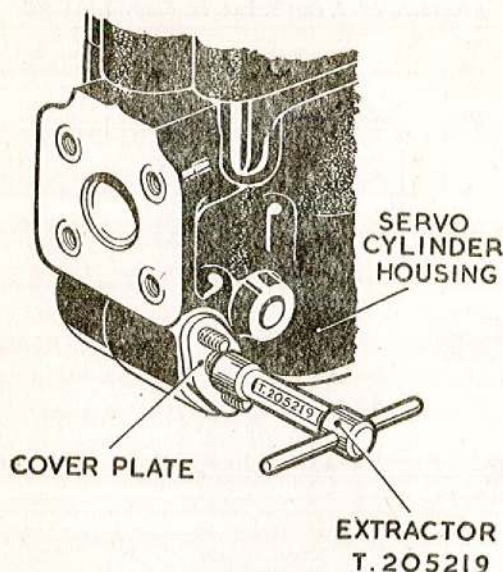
Withdrawing the flow control servo pressure orifice cover plate
